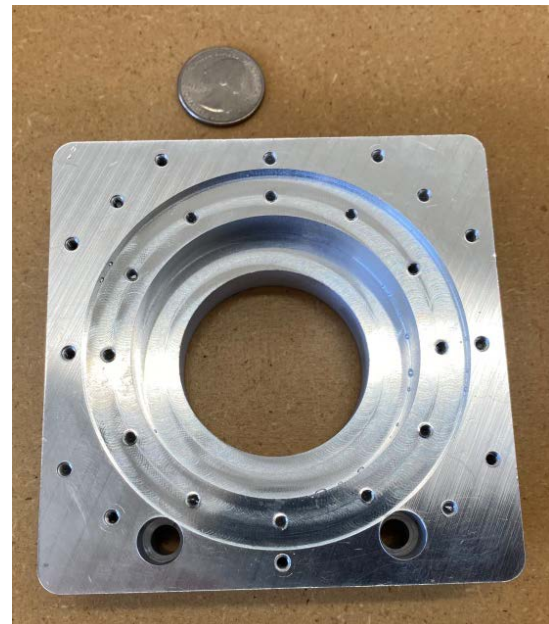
Part of the fabricated harmonic drive housing used to secure the components into their proper place
